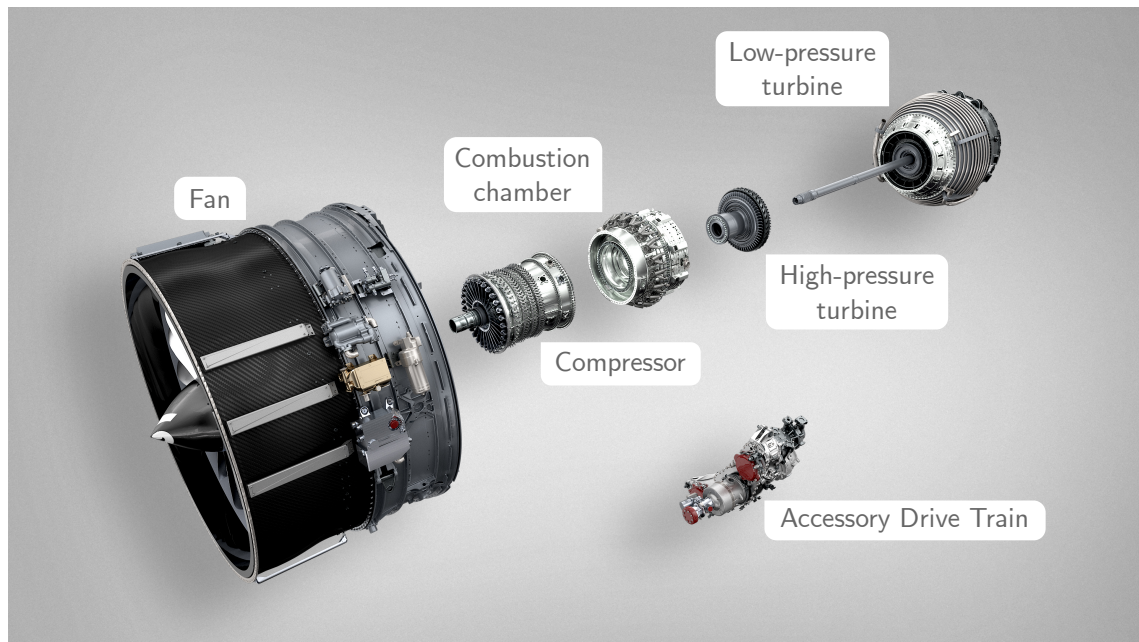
Exploded view of a LEAP 1-A engine (SAFRAN, 2020).
